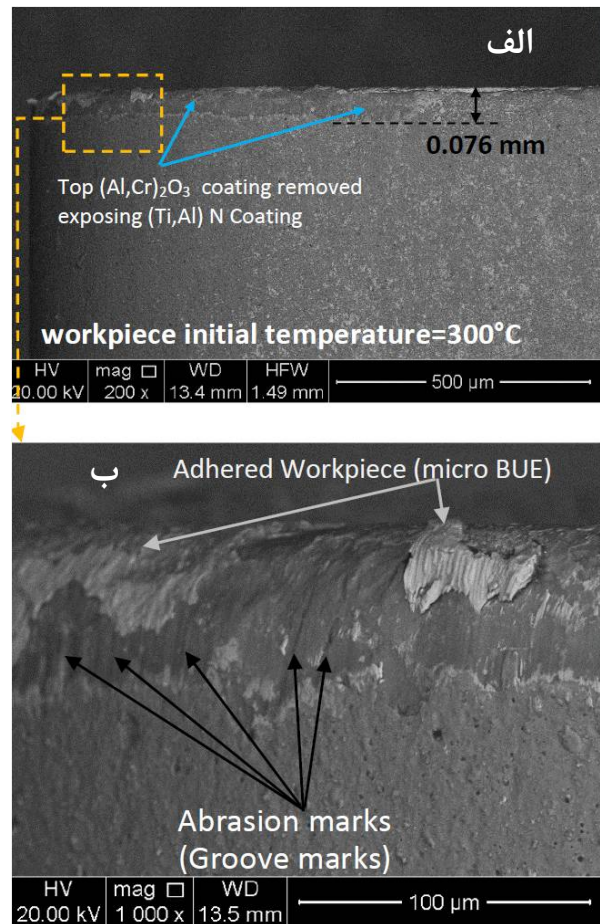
Cutting tool flank wear after 3 minutes cutting at a cutting speed 62m/min and feed 0.175mm/rev
